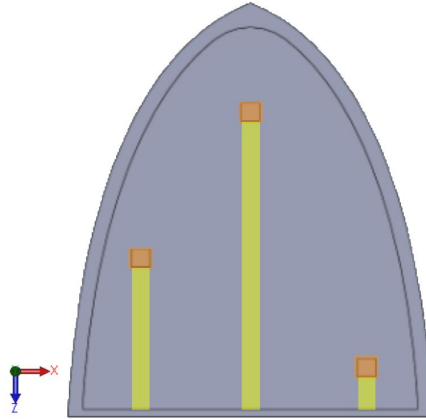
Tubing Integration Channels: An image showing the general shape of the mold as well as the location of each of the holes that tubes would be inserted into.
